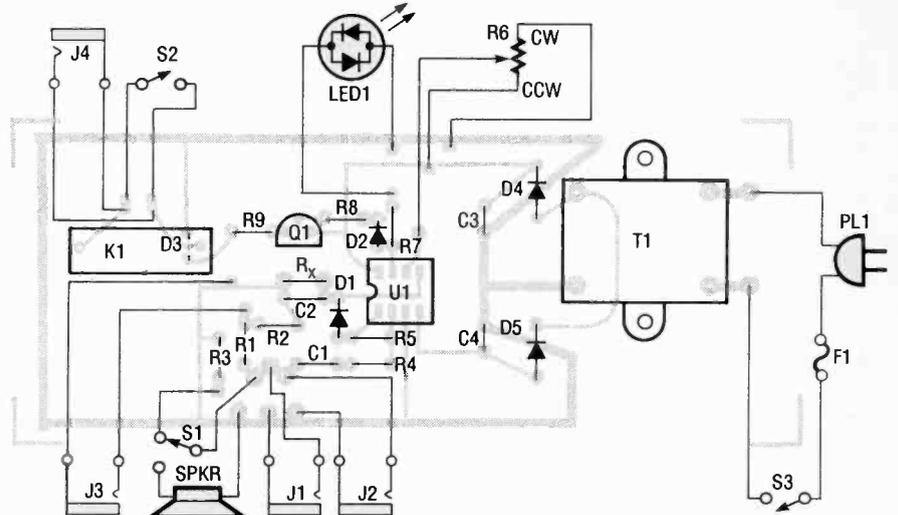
After preparing your printed-circuit board, consult this parts-placement diagram for the location and orientation of Auto-Scan's board-mounted components. The components not shown on the board are mounted on the front and rear panels of the enclosure.
